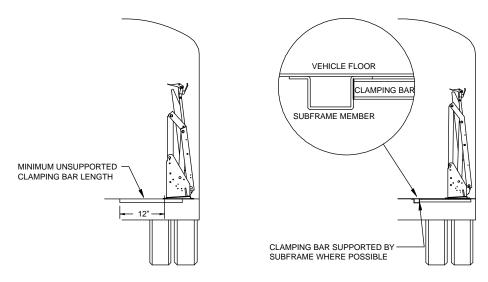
BUS CLAMPING BAR ARRANGEMENT
